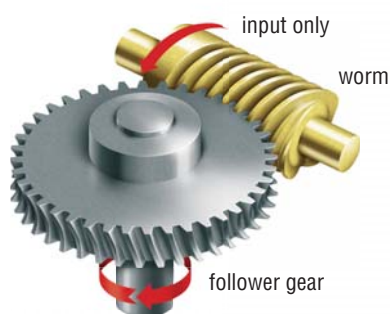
The worm in a worm gear drives a follower gear and can also change the axis of rotation through 90° (for example, the drive mechanism in a toy car).
